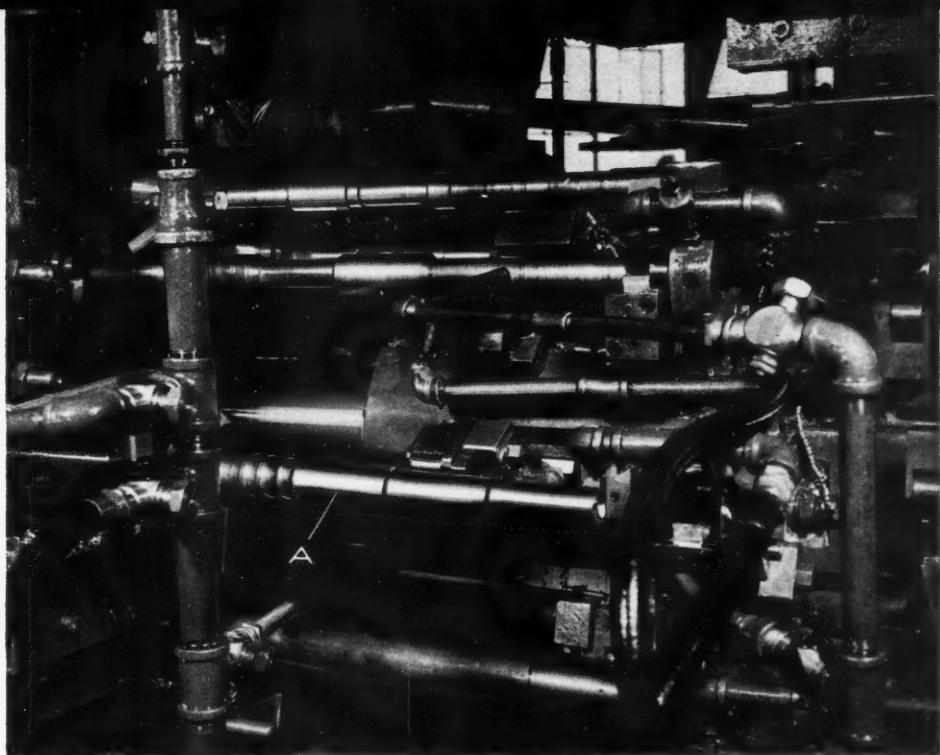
Tooling lay-out for producing the transmission shaft illustrated in Fig. 1 on eight-spindle Conomatic automatic bar machines
